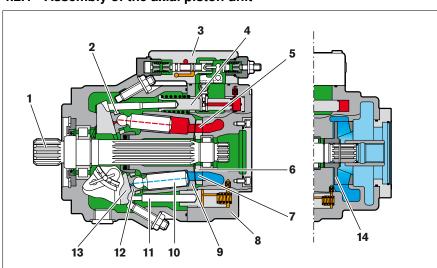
Left-hand illustration: Assembly of A11VO. Right-hand illustration: A11VLO
